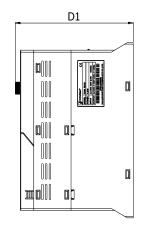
15kW G3 and above power product outside drawing, installation dimension
